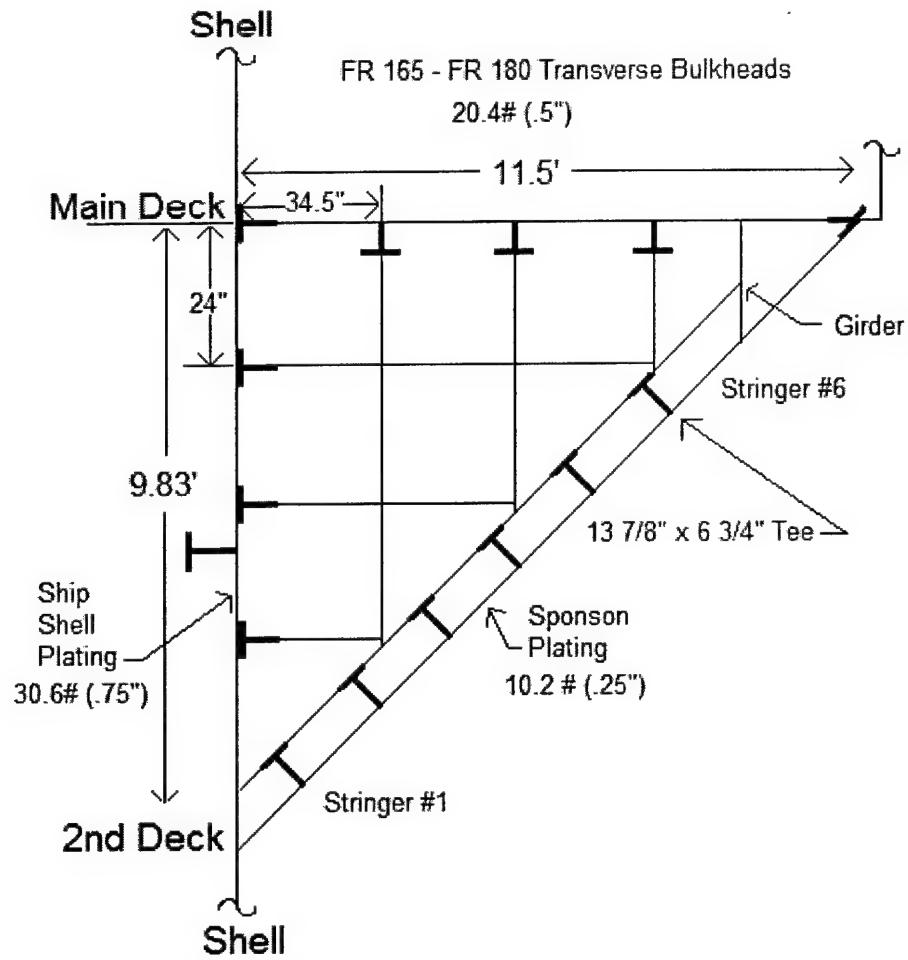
2nd Deck Compartment 2-165-8-V, transverse section
